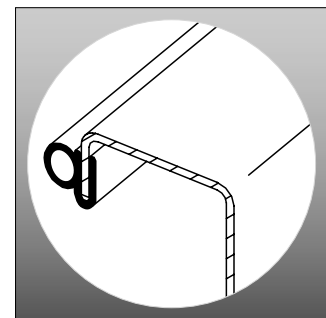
A side sealing can be fastened to the returned edge of the side wall.
